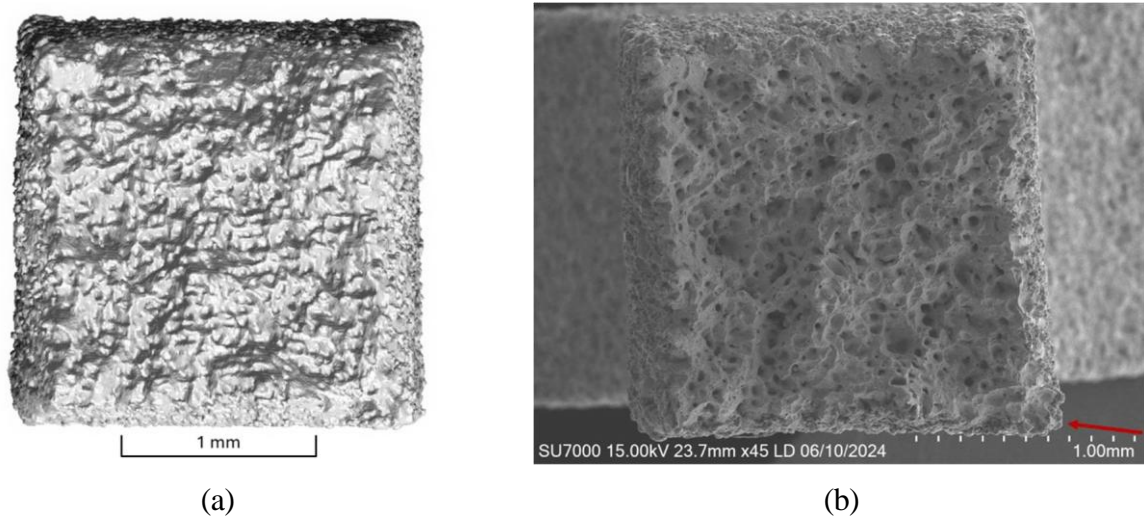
Fracture plane of specimen 16 imaged via: (a) CT, (b) FE-SEM.
